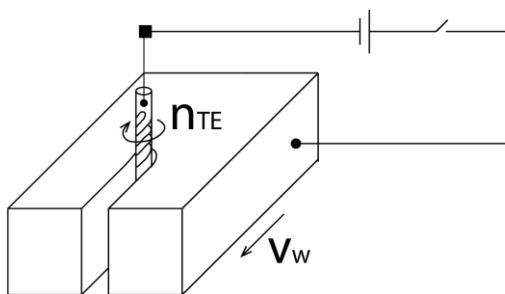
Intensification of electrolyte circulation by rotating the tool electrode in the form of a thin rod equipped with helical grooves
